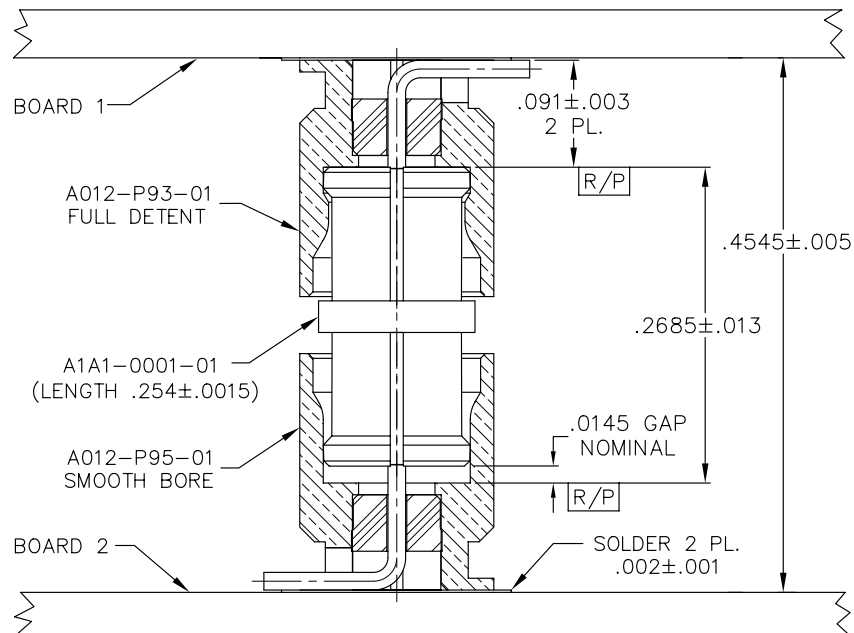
GPO Board-to-Board Tolerance Analysis
